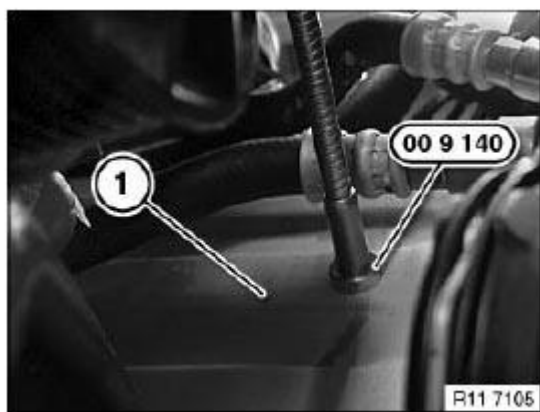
Securing Special Tool 00 9 140 With Magnet To Engine Carrier
